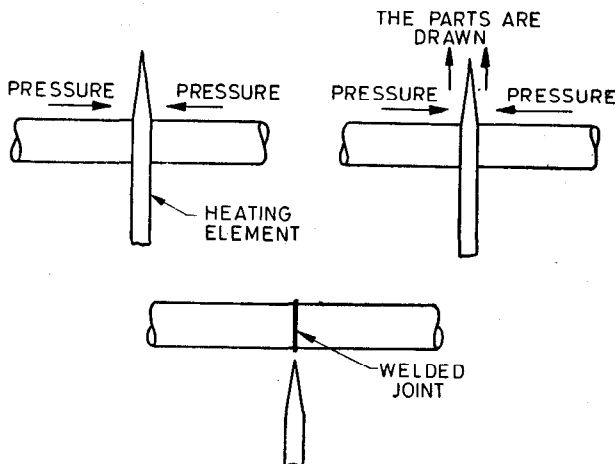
HEATED TOOL WELDING OF A BUTT JOINT WITHOUT FILLER MATERIAL
